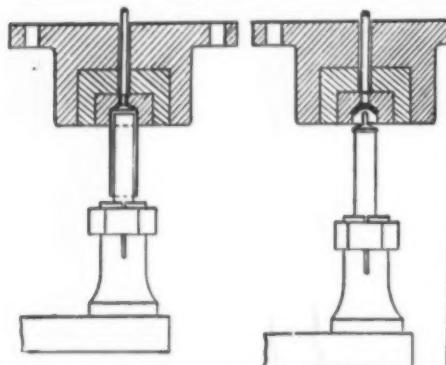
Impact extrusion arrangement for making collapsible tubes.
